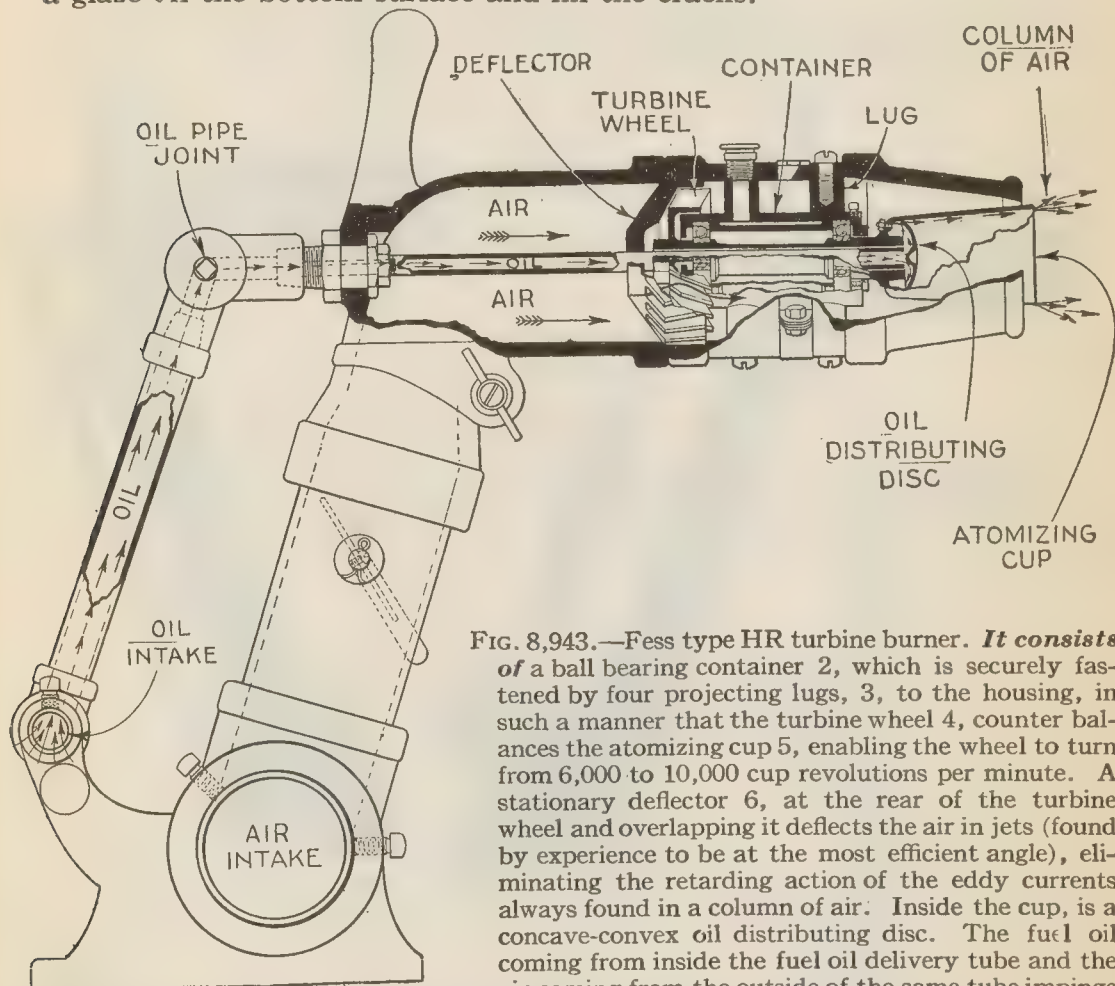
,943.—Fess type HR turbine burner. *It consists of a ball bearing container 2, which is securely fastened by four projecting lugs, 3, to the housing, in such a manner that the turbine wheel 4, counter balances the atomizing cup 5, enabling the wheel to turn from 6,000 to 10,000 cup revolutions per minute. A stationary deflector 6, at the rear of the turbine wheel and overlapping it deflects the air in jets (found by experience to be at the most efficient angle), eliminating the retarding action of the eddy currents always found in a column of air. Inside the cup, is a concave-convex oil distributing disc. The fuel oil coming from inside the fuel oil delivery tube and the air coming from the outside of the same tube impinge
